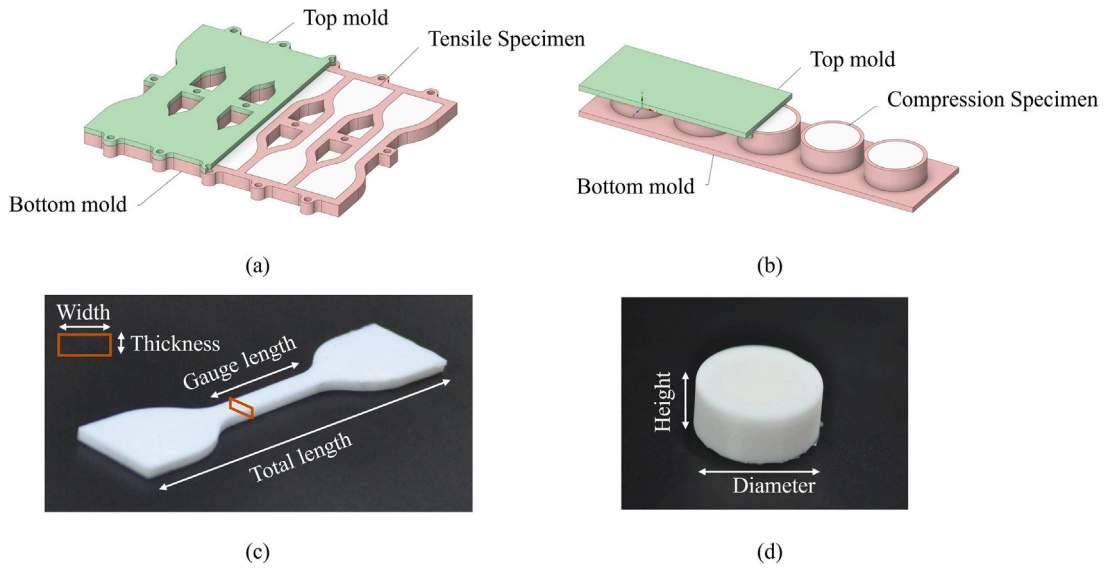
CAD models of (a) tensile and (b) compression specimen molds, manufactured specimens for (c) tensile and (d) compression tests.
